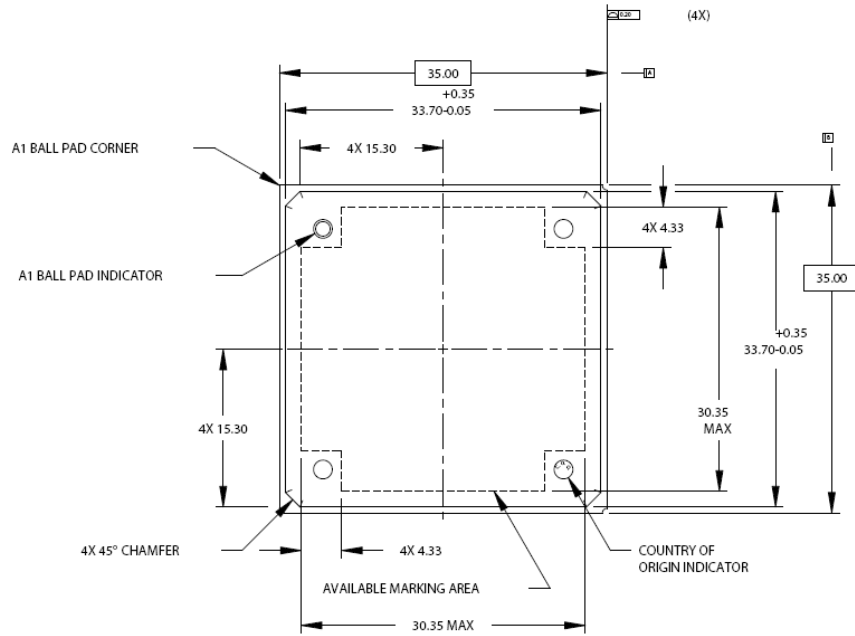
schematic of package foot-print, including all relevant dimensions [13].
